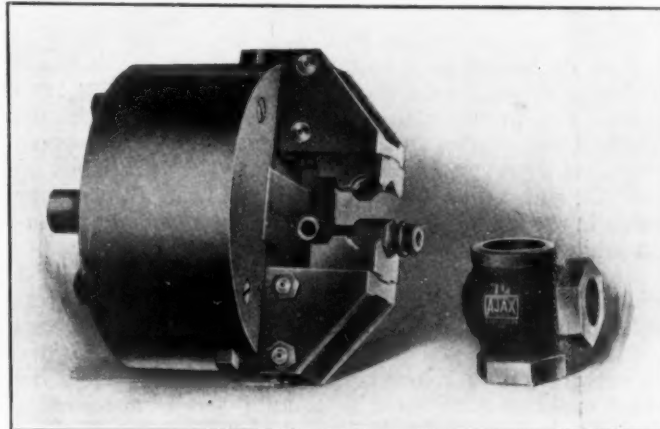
TWO JAW UNIVERSAL AERO CHUCK WITH SPECIMEN OF CASTINGS.
